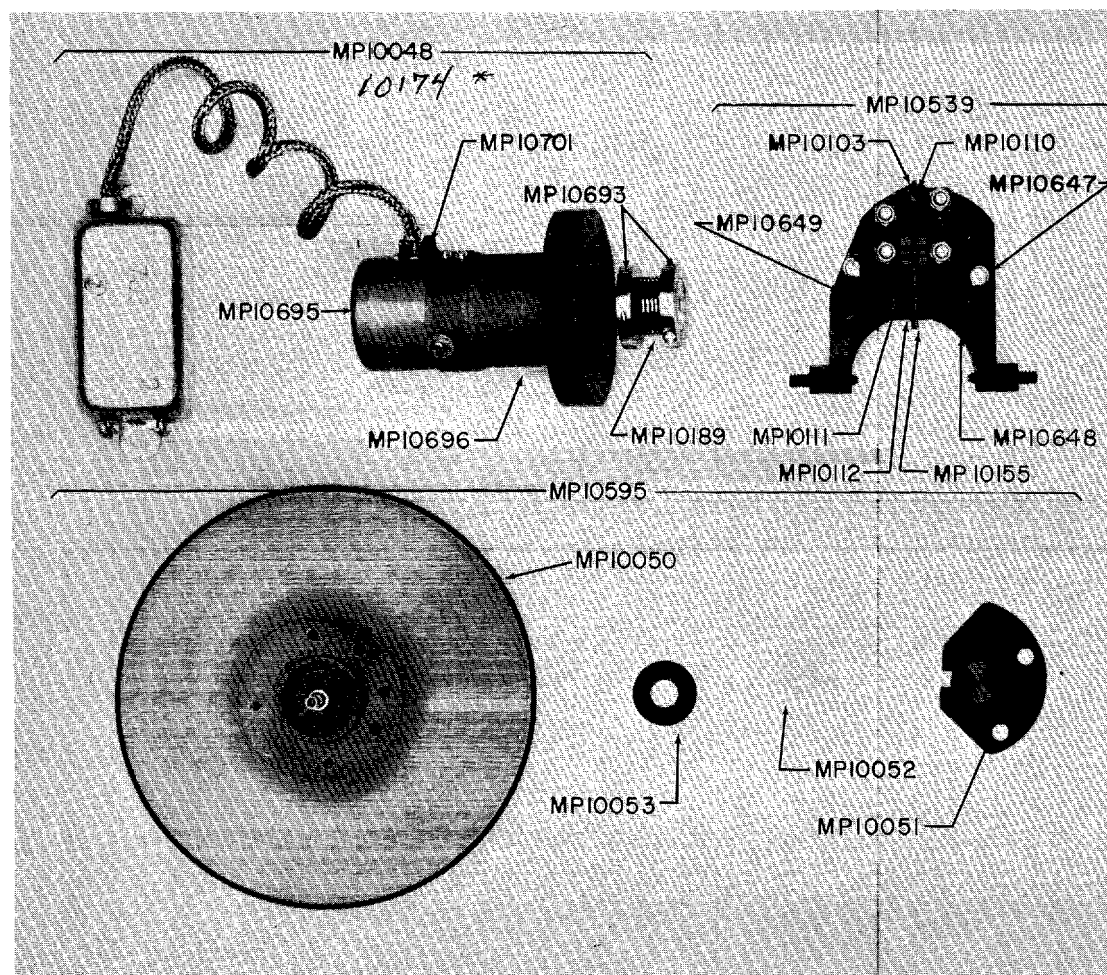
A. Capstan and Capstan-Drive, Motor and Flywheel, and Capstan-Motor Mounting Assemblies, Parts Callouts
